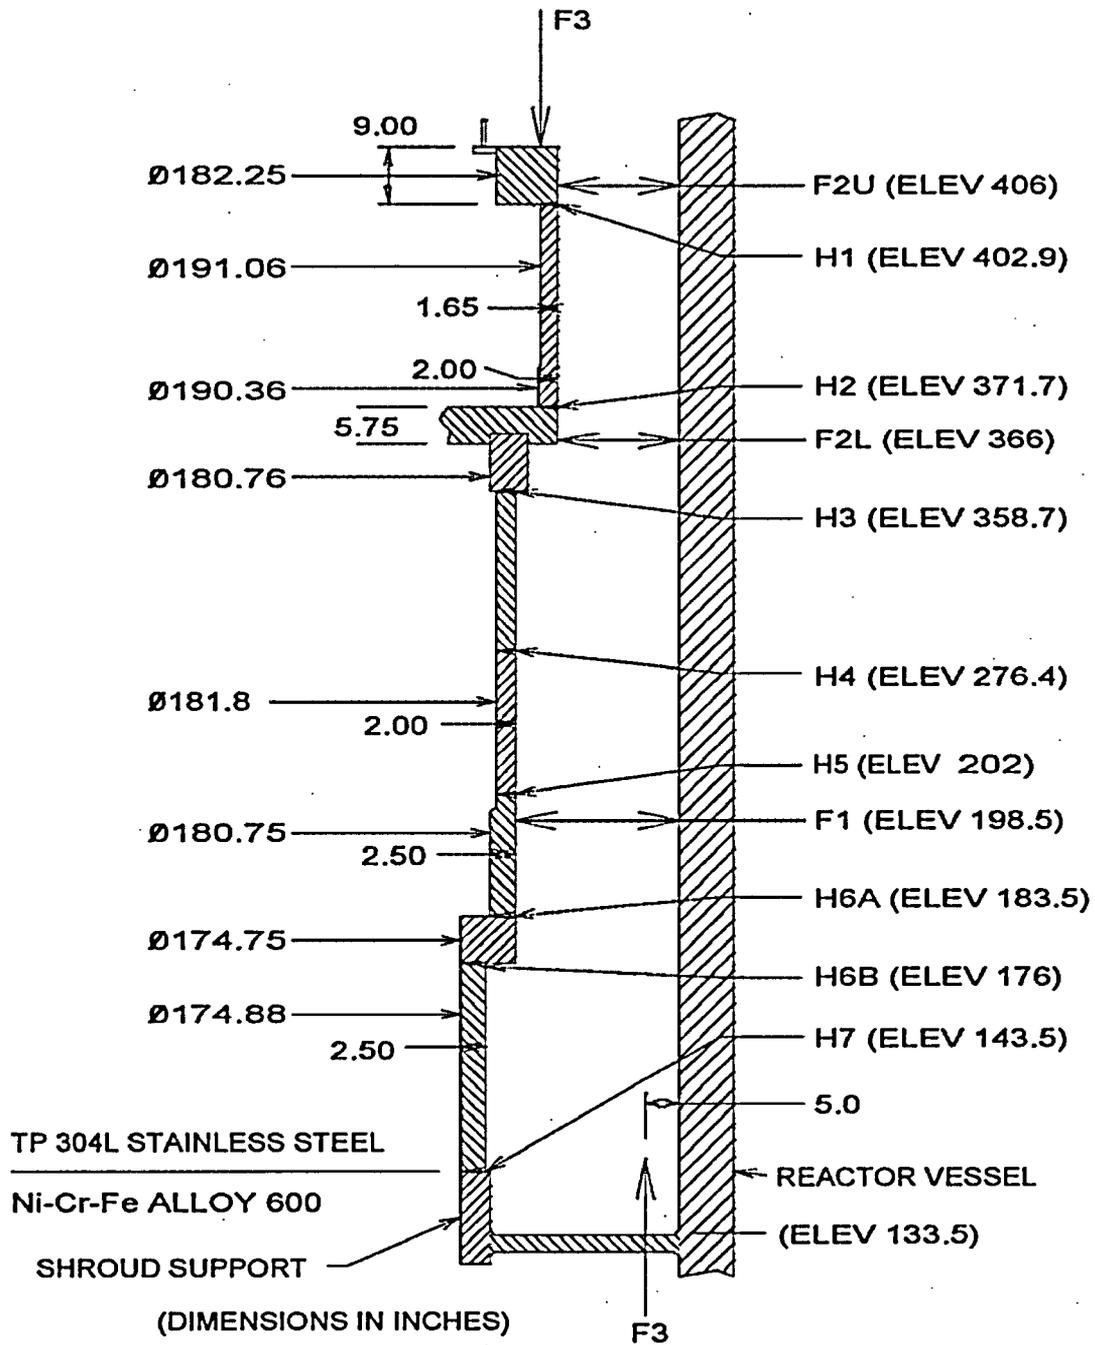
Shroud Horizontal Weld Locations
